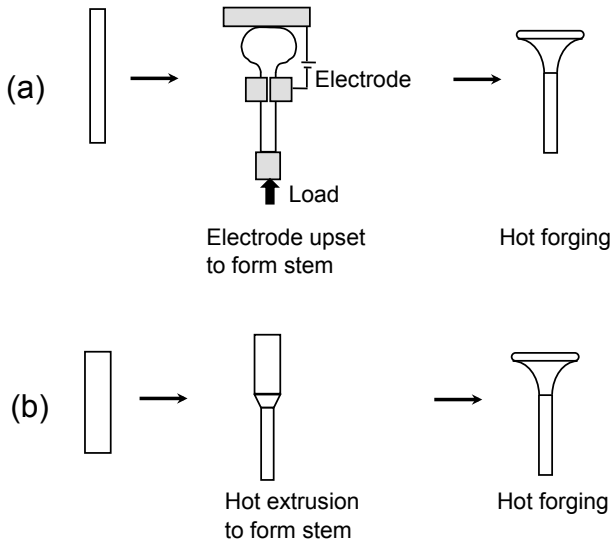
Schematic illustration of valve manufacturing process: (a) Electrode upset, (b) Hot extrusion.
